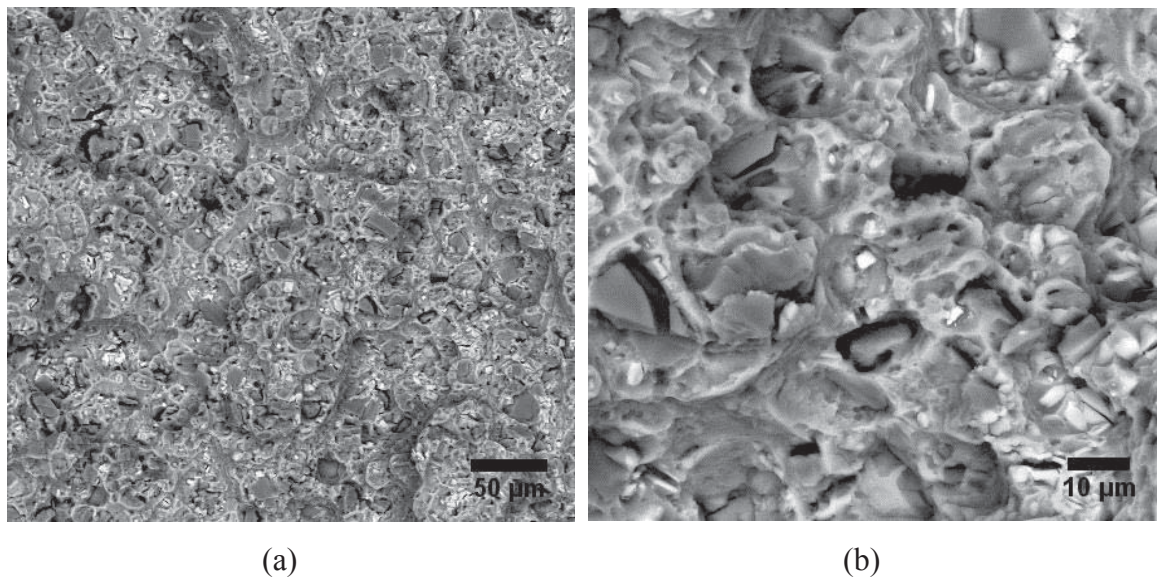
Backscatter secondary electron image of the aluminium MMCs fracture surface.
